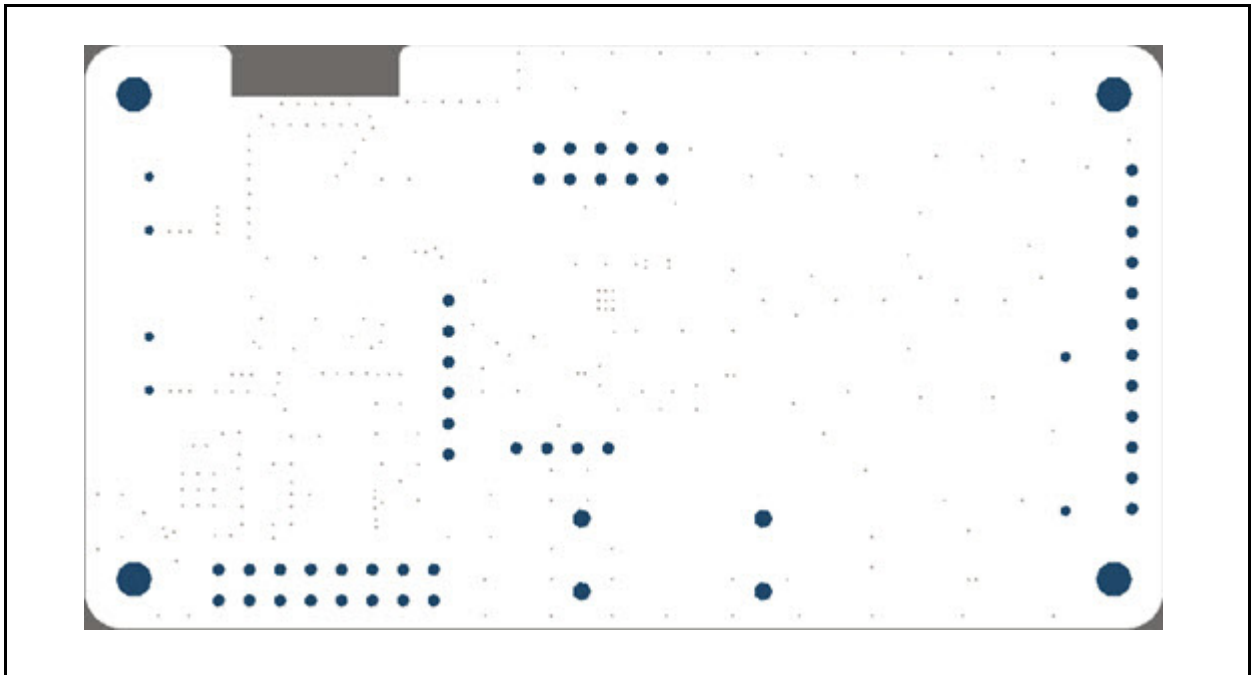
RN52 EVALUATION BOARD BOTTOM ASSEMBLY
